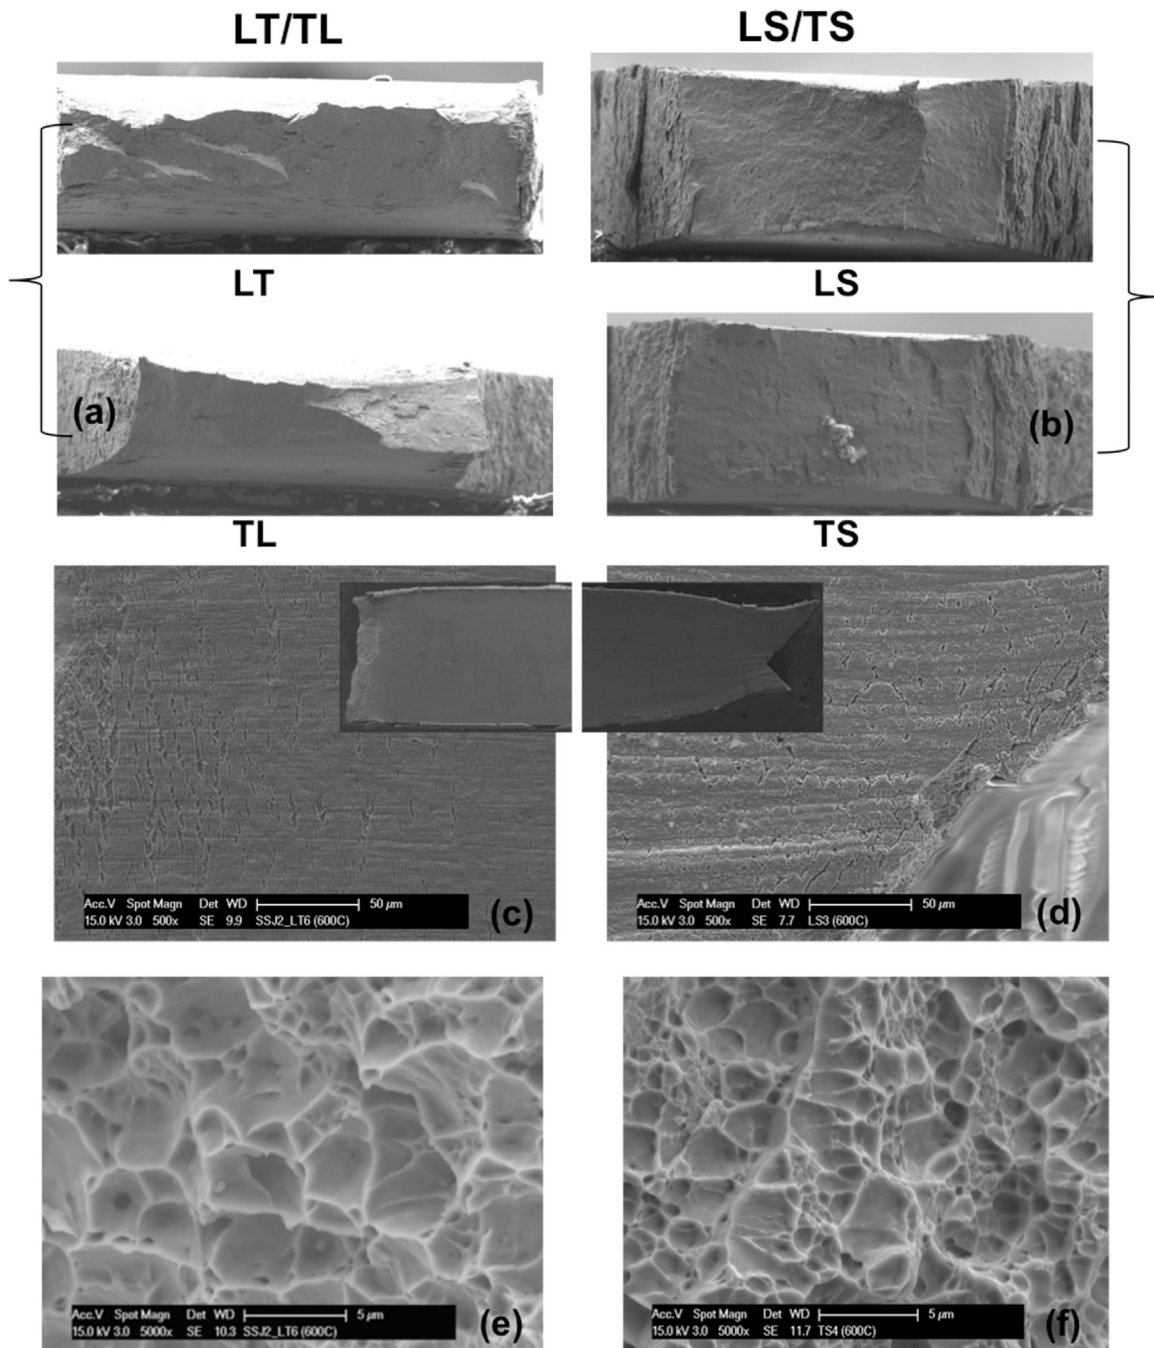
Images of NFA-1 LT and TL (left), and LS and TS (right) tensile specimens tested at 600 °C showing: (a–b) macro views of a fracture surface; (c–d) macro (insert) and higher magnification views of a tensile specimen side surface; and (e–f) high magnification images of ductile fracture surfaces. See text for a discussion.
